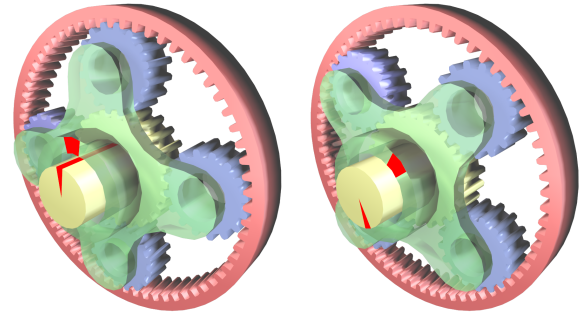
Planetary gear train consisting of a sun gear (yellow), planet gears (blue) supported by the carrier (green) and a ring gear (pink).
